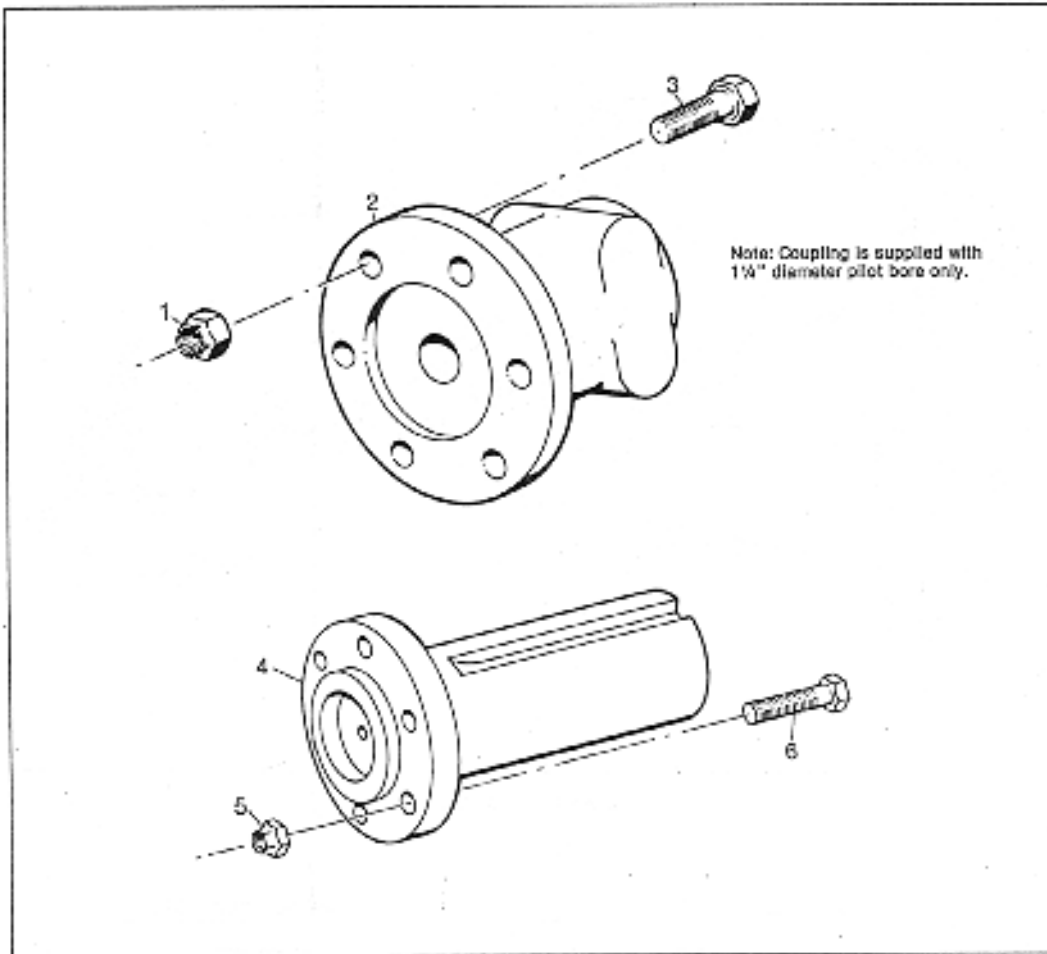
Propeller Flange Coupling and Keyed Shaft Kits.
